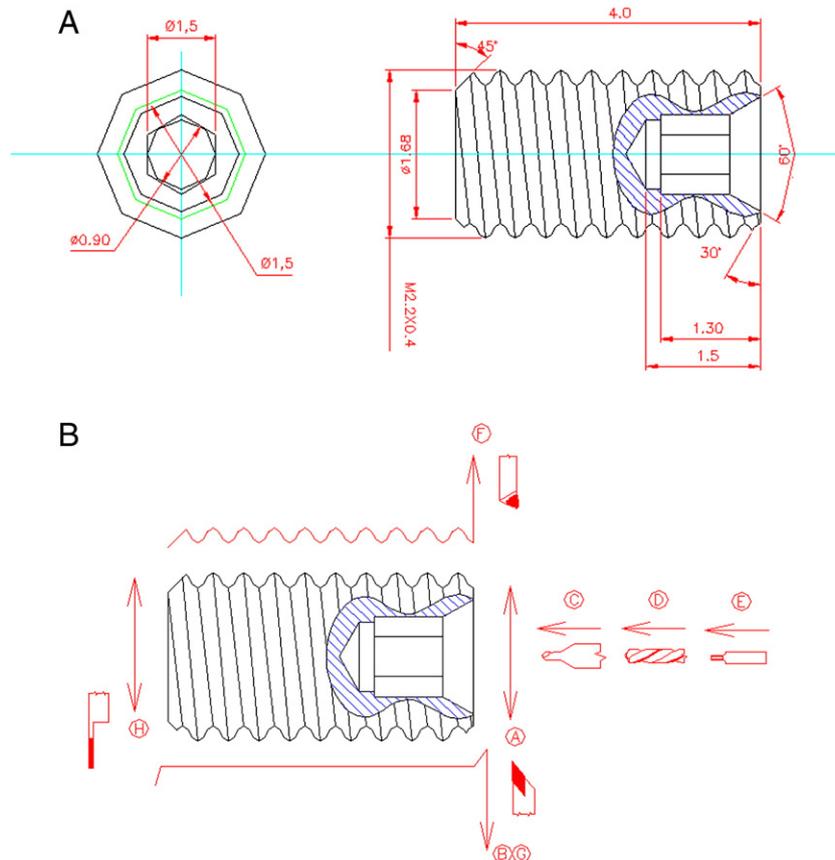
Details on the dimension and thread of Ti–10Si–5B screws used in this work in (A). The sequence used during machining of screw implants is displayed in (B).
